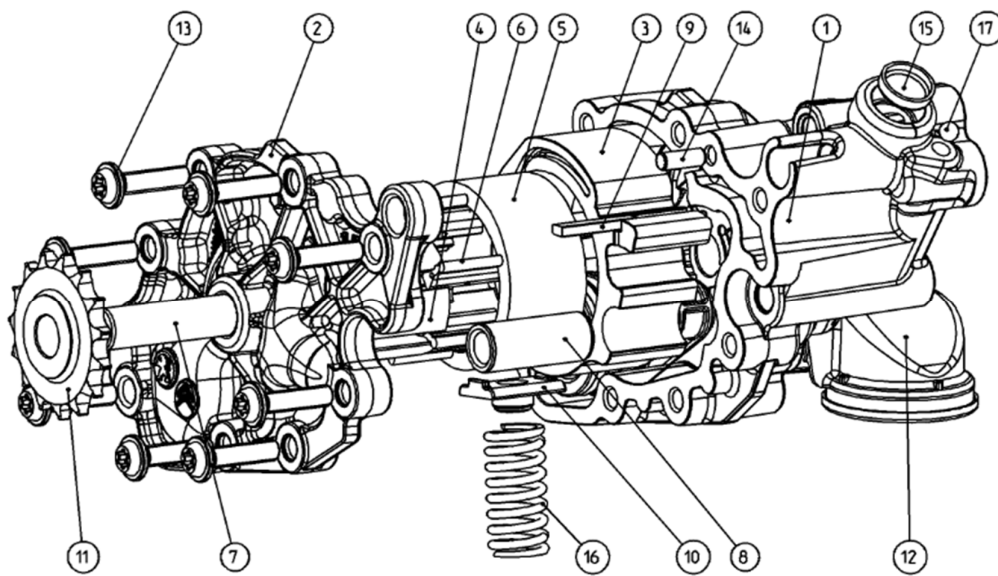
Exploded view of VOP. 1- pump housing, 2- pump cover, 3- control slider, 4- inner rotor, 5- outer rotor, 6- pendulum, 7- shaft, 8- bearing tube, 9- sealing strip, 10- spring support, 11- sprocket, 12- oil suction pipe assembly, 13- bolts, 14- dowel pin, 15- seal cap, 16- regulation spring, 17- ball [5]
